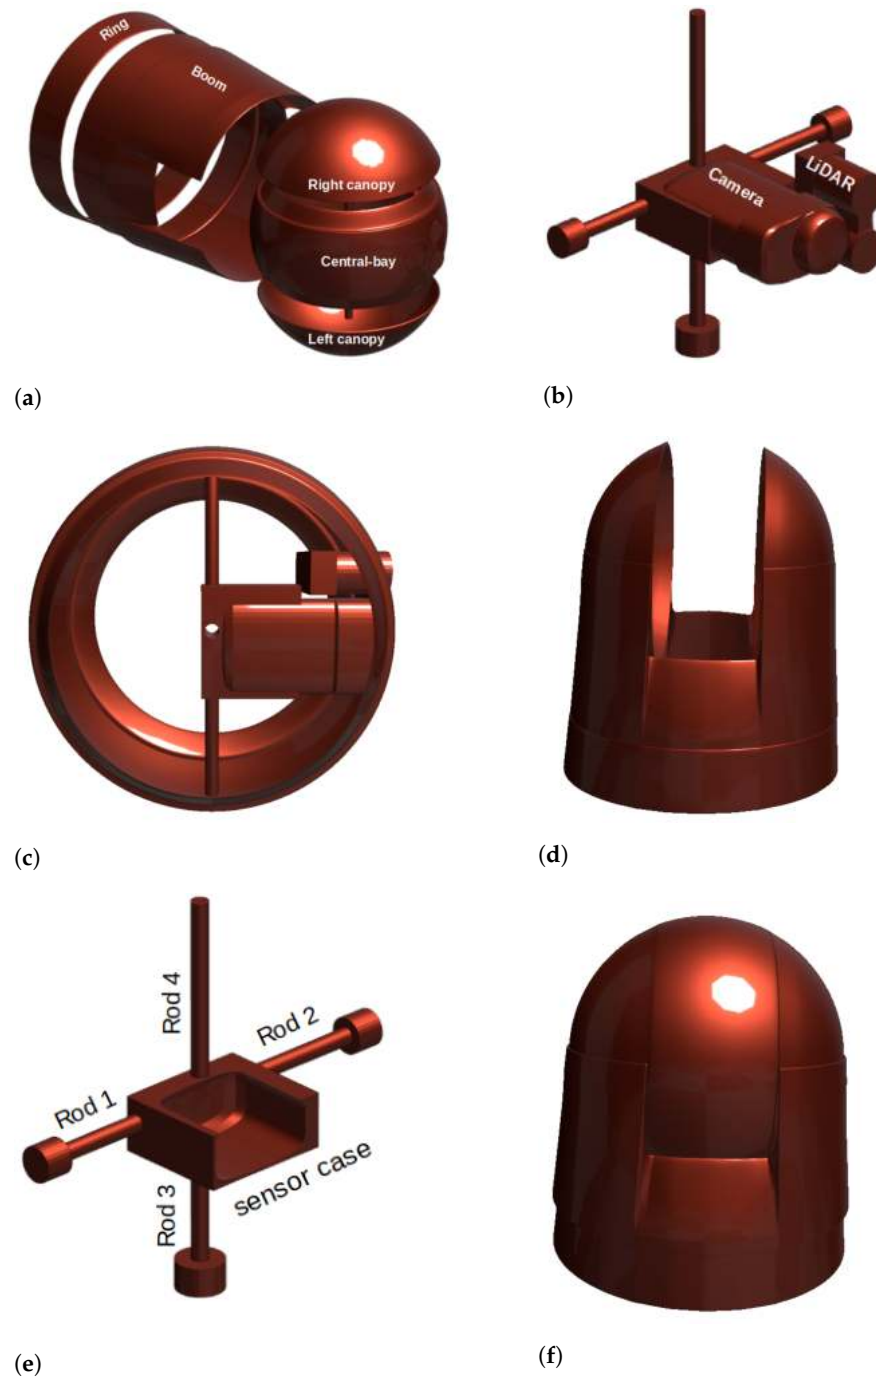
Platform components and their configuration. (a) Components of the platform; (b) sensors configuration in the platform; (c) inner gimbal; (d) outer gimbal; (e) sensor case and connection rods; (f) assembled platform.
